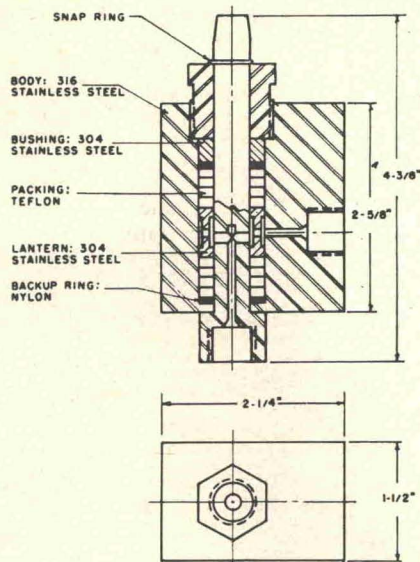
AUTOCRAVE 0.25-IN. HIGH PRESSURE SWIVEL JOINTS.
